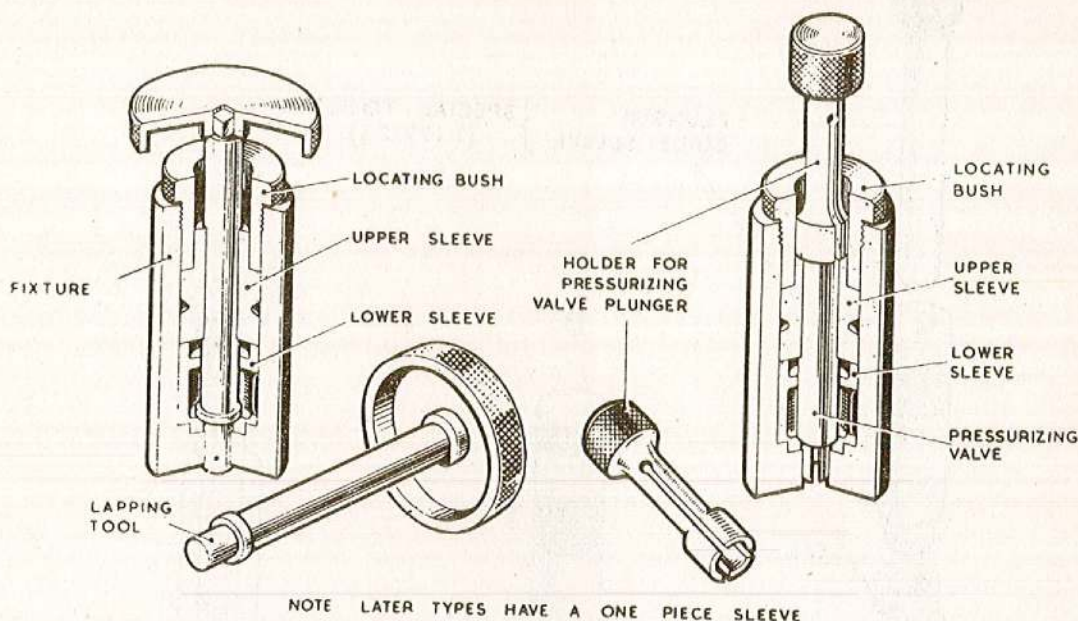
View of fixture, lap and holder, T.177126 for lapping pressurizing valve sleeve faces and plunger
